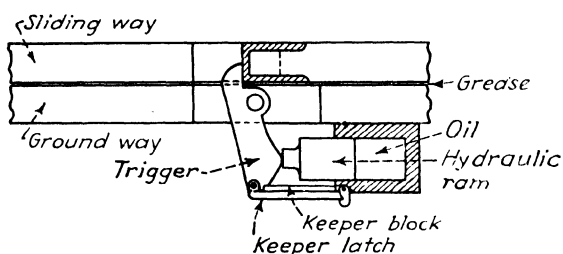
A.—Typical hydraulic trigger arrangement (one trigger is placed in each way). Mechanical triggers with a system of levers replacing the hydraulic ram are also used.
